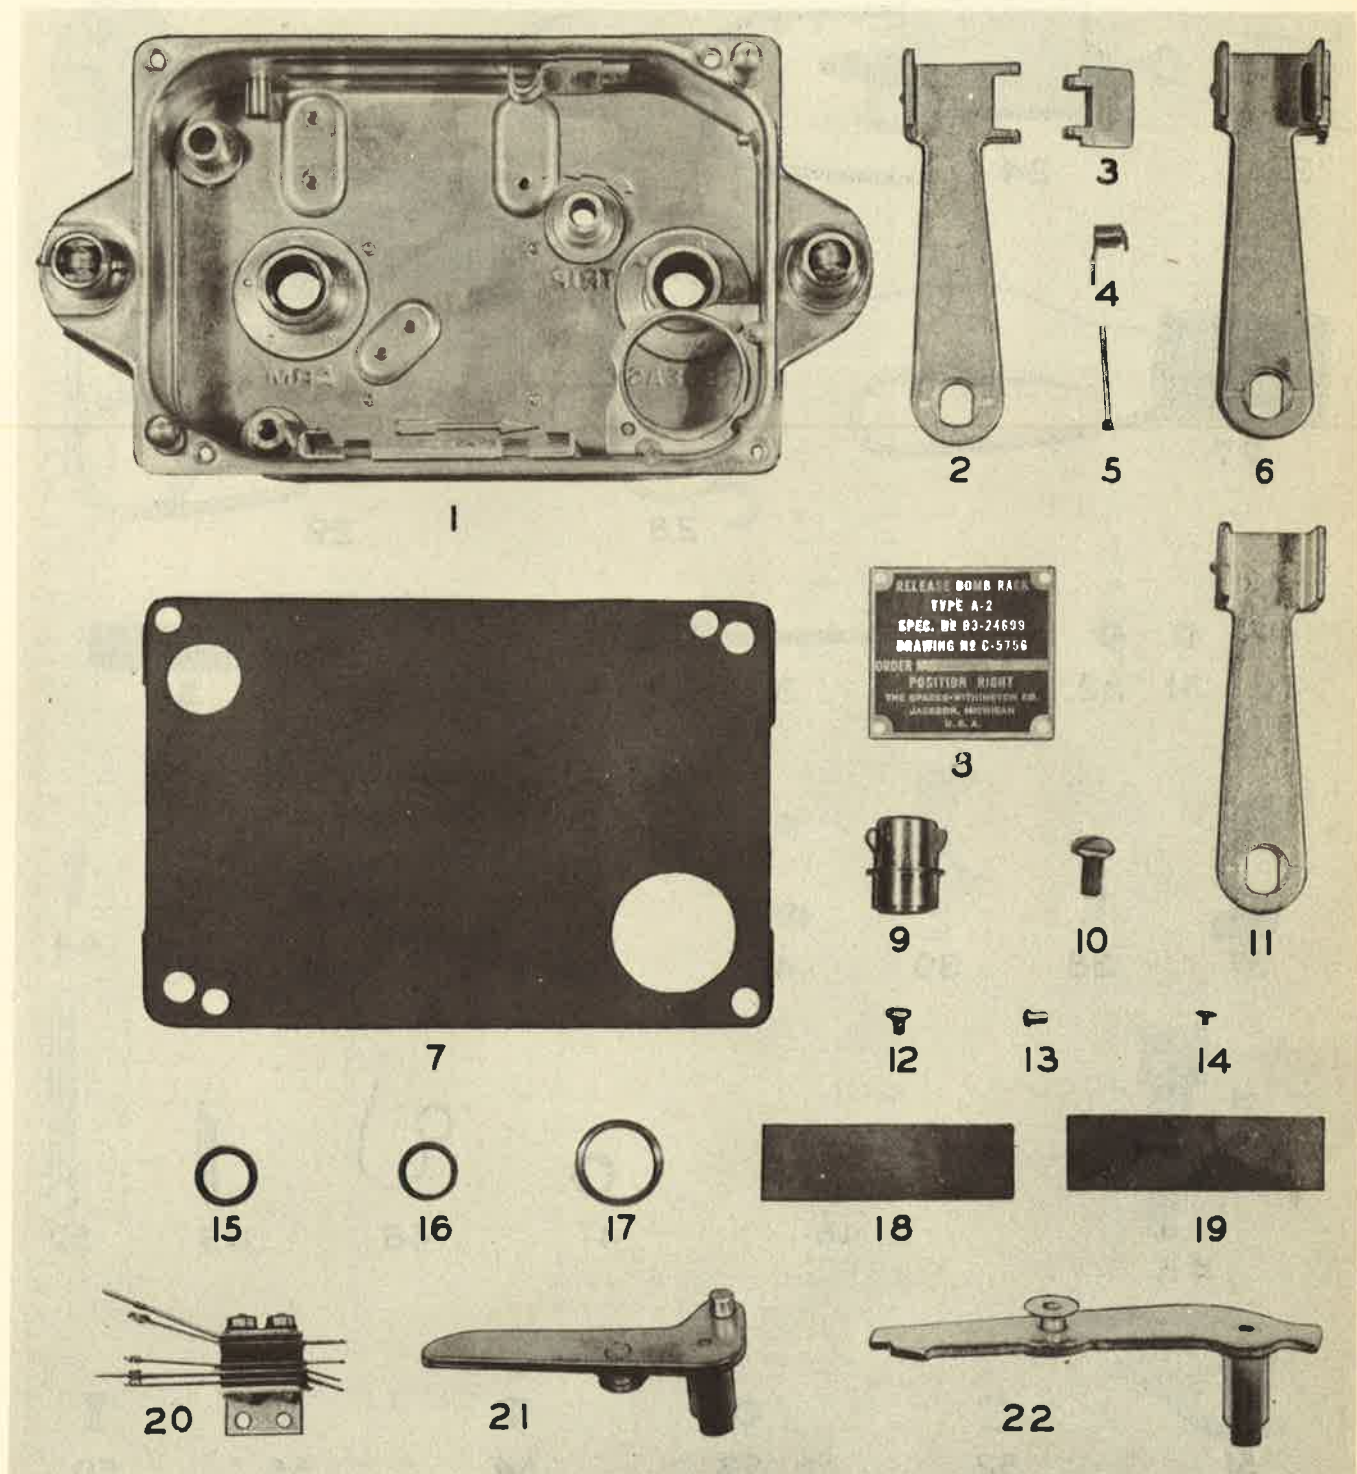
Disassembled View - Type A-2 Bomb Rack Release
